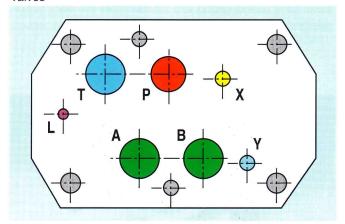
Mounting pattern, form A16 DIN 24 340 Mounting pattern size 16 preferrably used for pilot operated directional valves of this size
